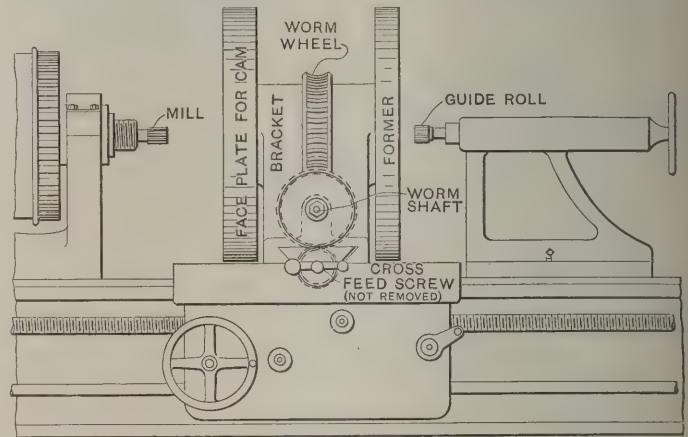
Attachment with Power Feed for Cutting Face Cams.
